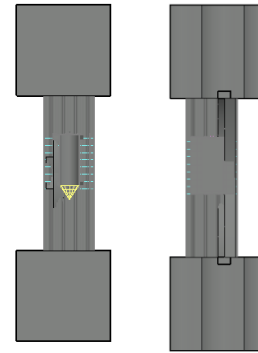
Actual proposed design: Top view (right), bottom view (left)
